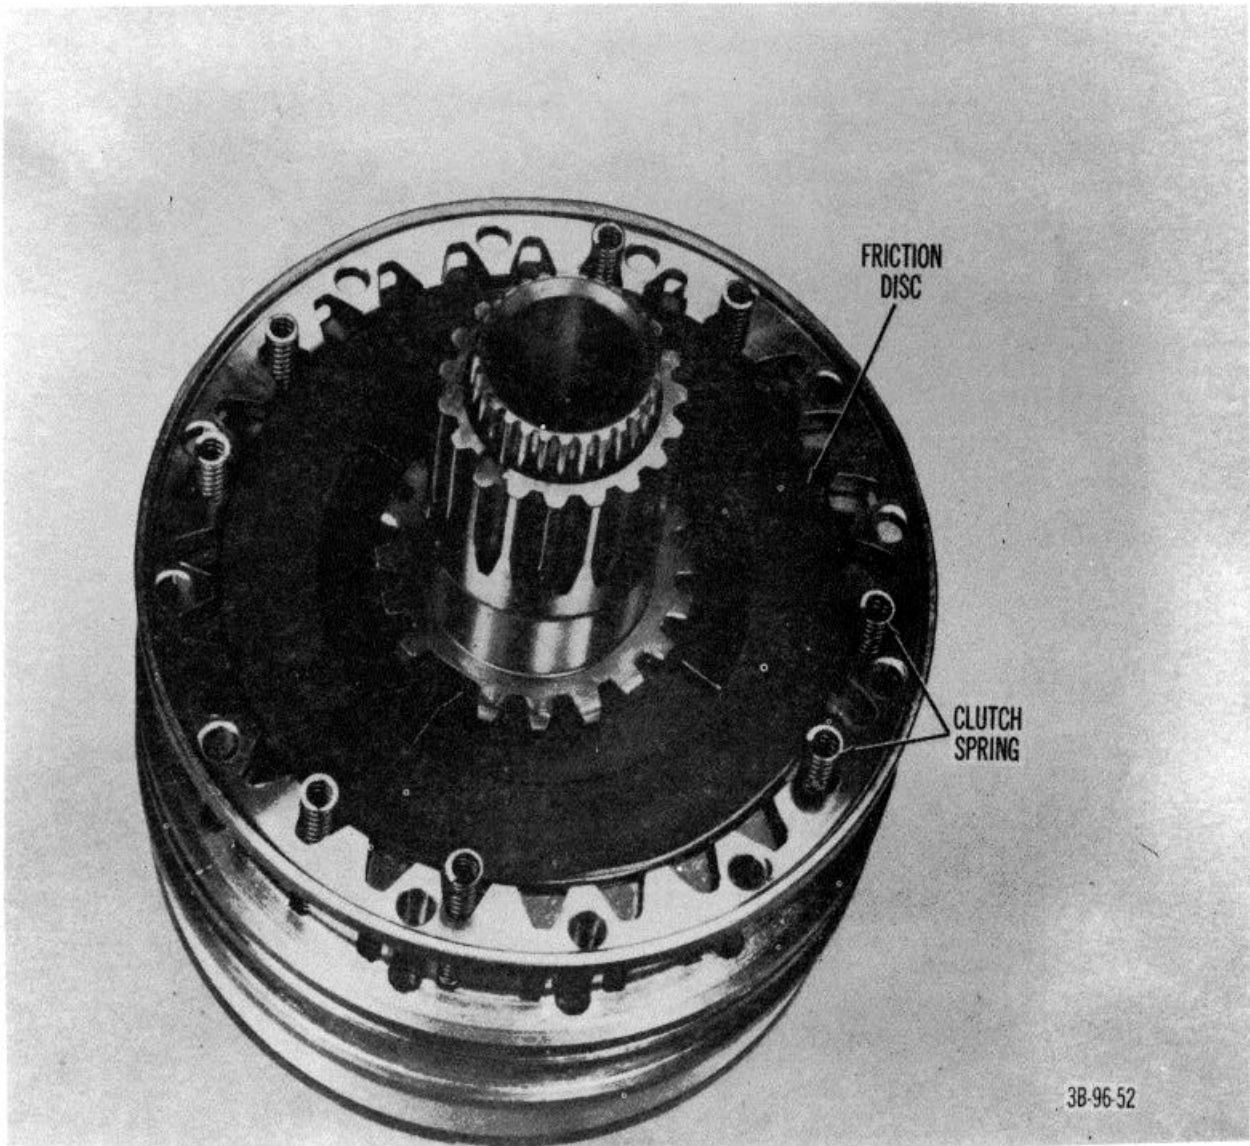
Friction disk and clutch springs installed on high gear clutch hub.
